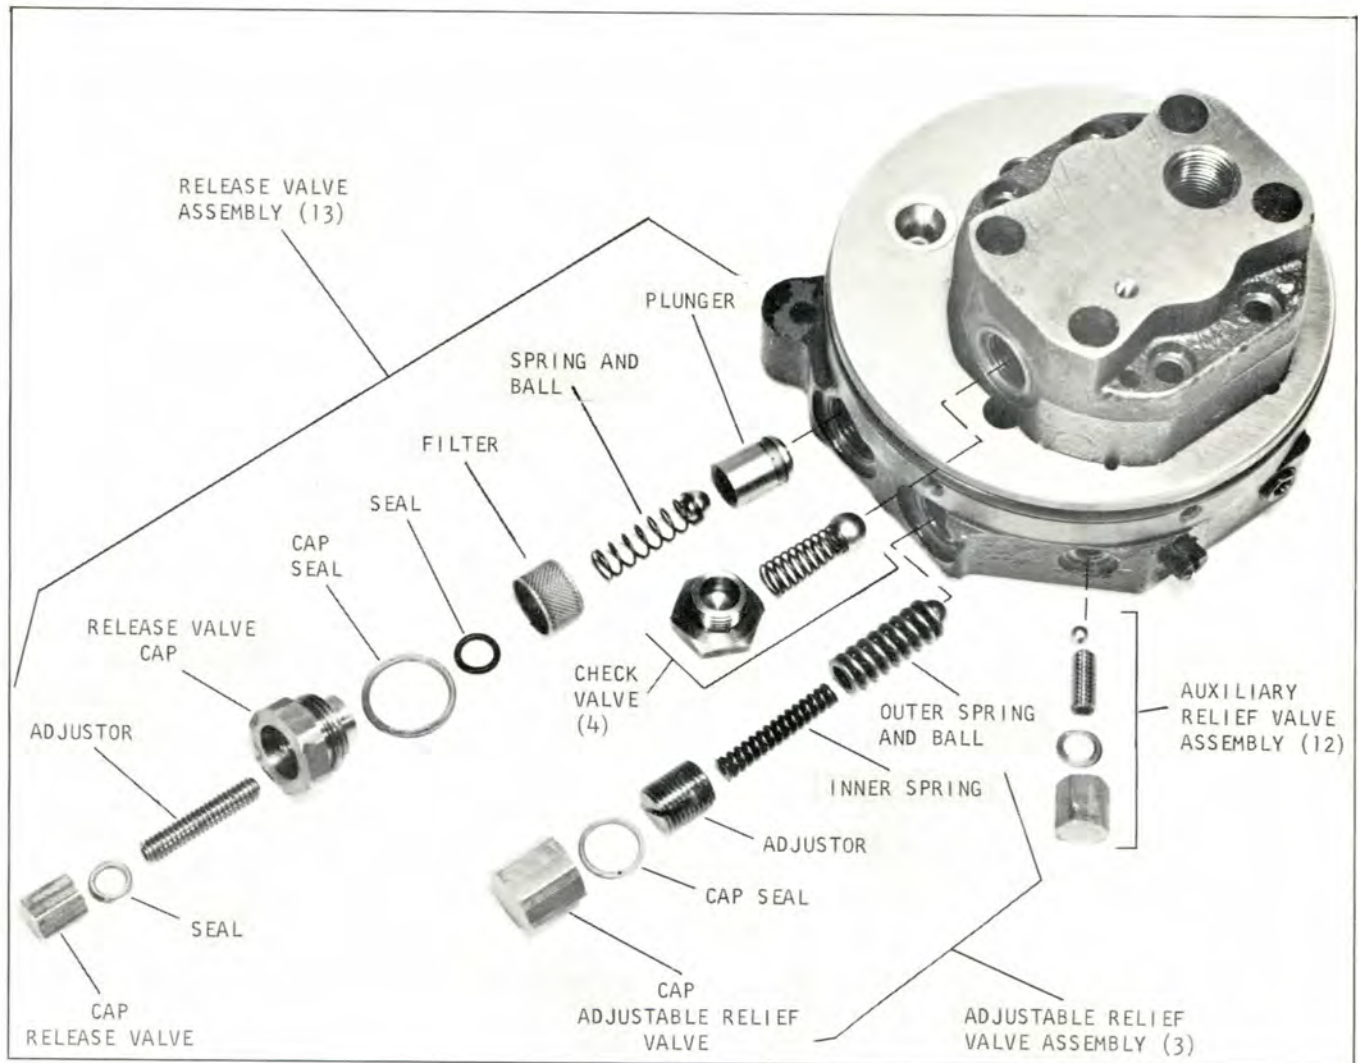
Hydraulic Unit Check, Release, and Relief Valves
